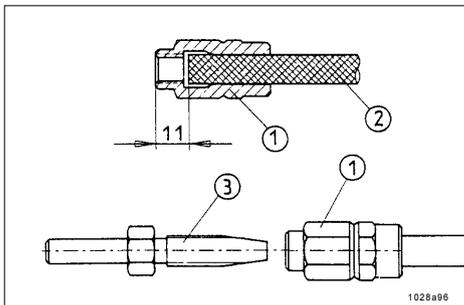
Preassembly of the threaded sleeves and hose studs on the high-pressure plastic hose
